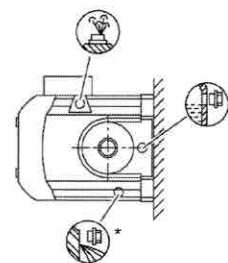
Mounting positions for helical gearbox E, foot-mounted design, sizes 39 - 149
